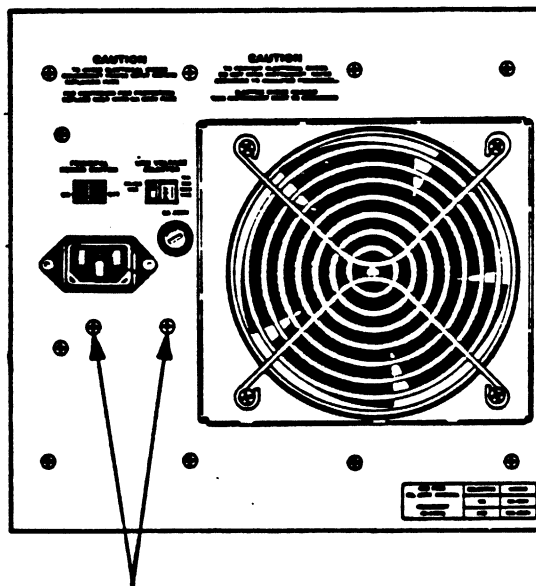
AD. Rear panel mounting screws for the A2A2 Control Rectifier Board.
